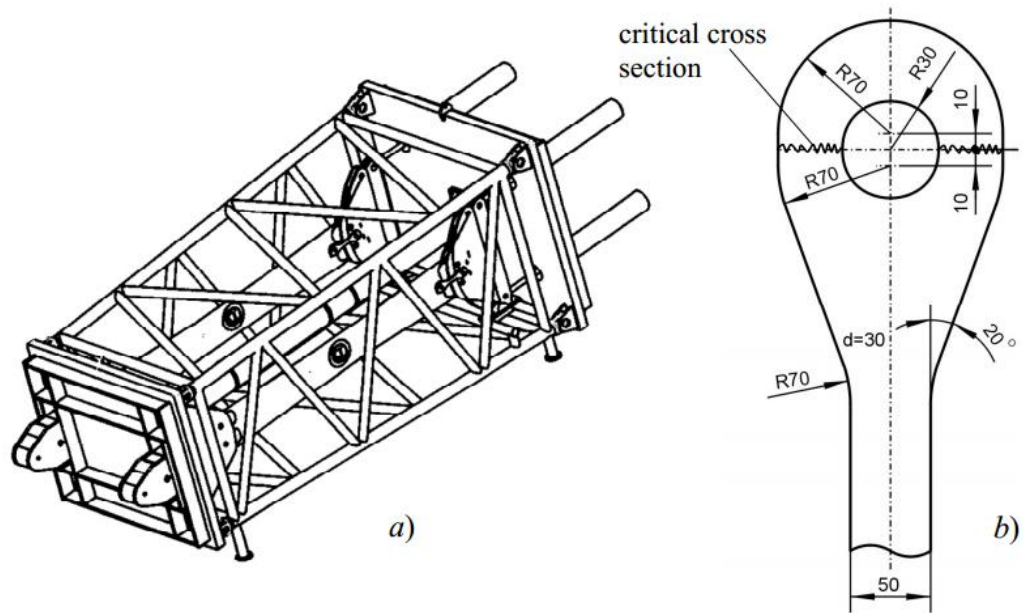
Fatigue testing machine (a) and testing bar (b)
